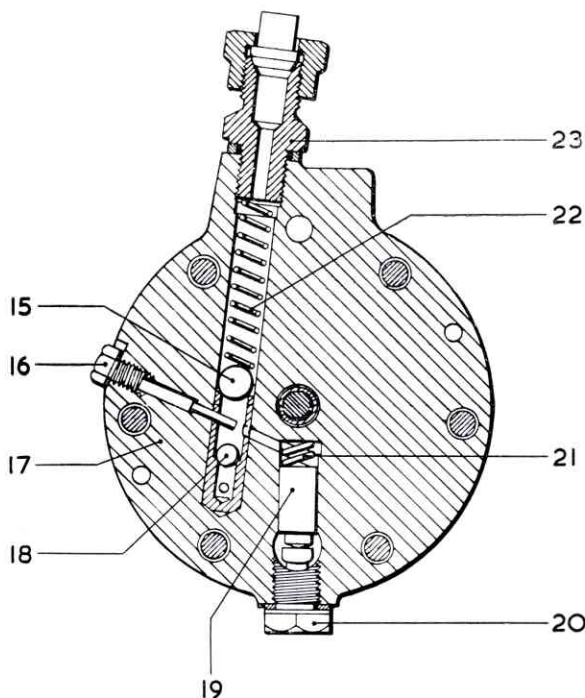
SECTION THROUGH THE SCAVENGE PUMP
